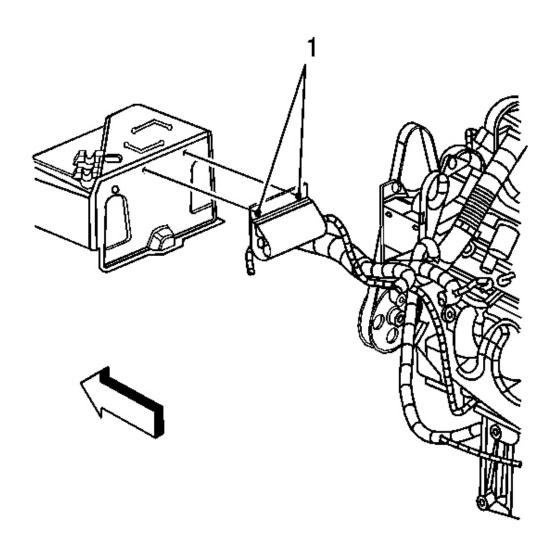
View Of Coolant Heater Cord Retainers Courtesy of GENERAL MOTORS CORP.
